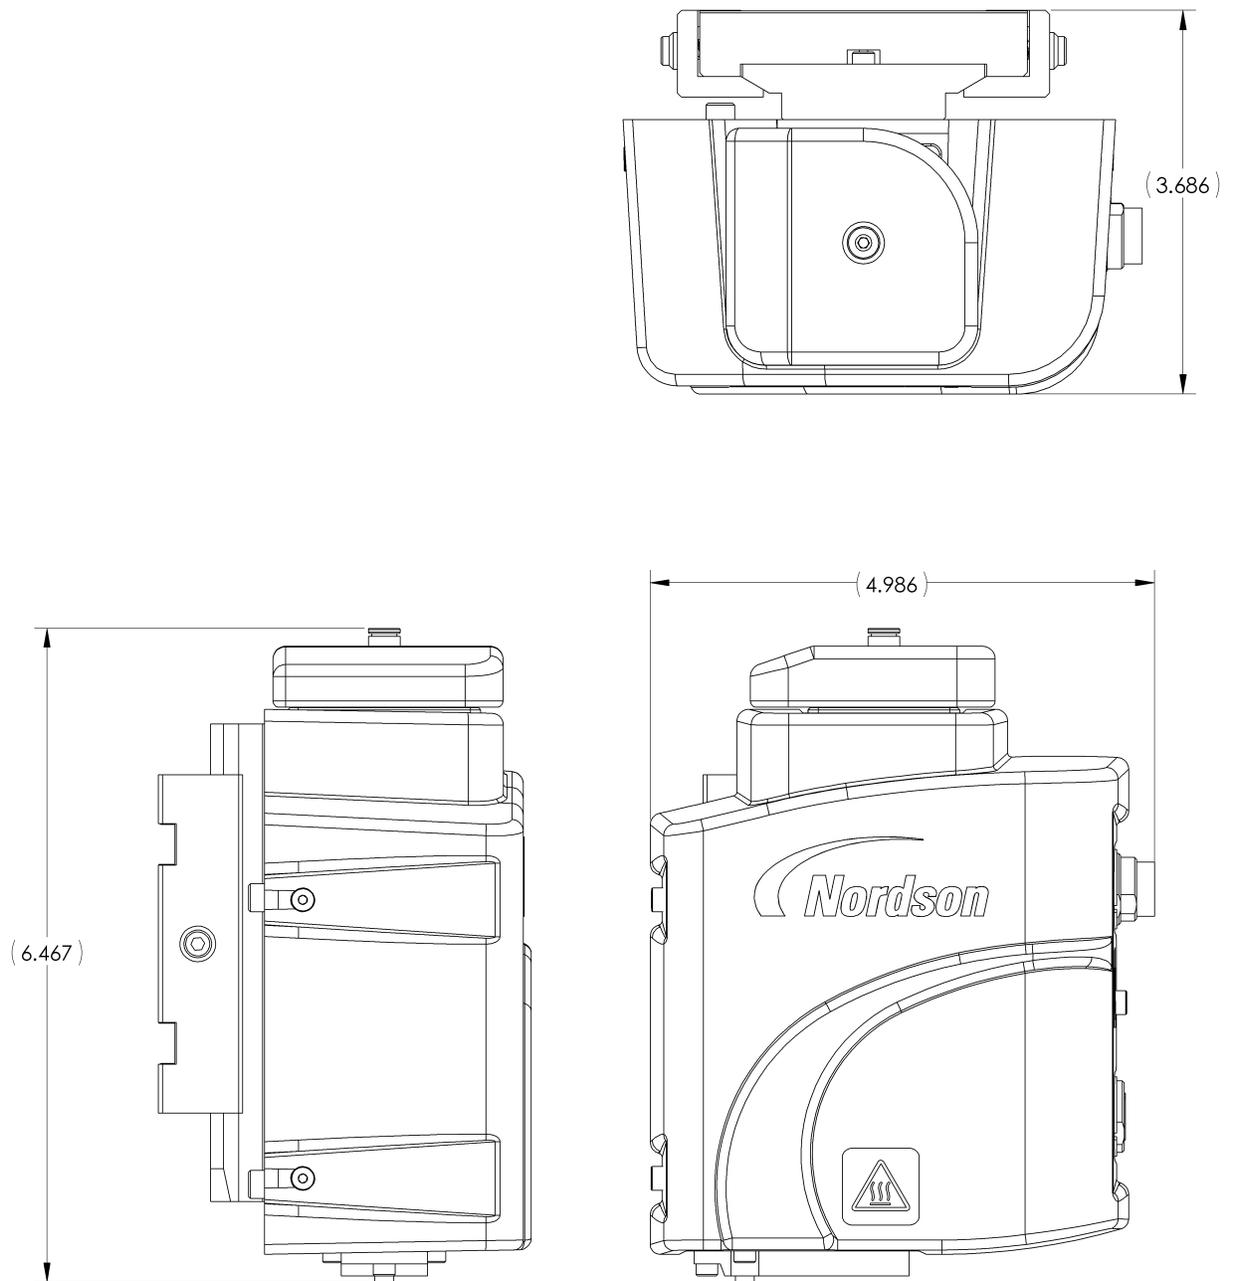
Vulcan Jet applicator dimensions, (in.)
